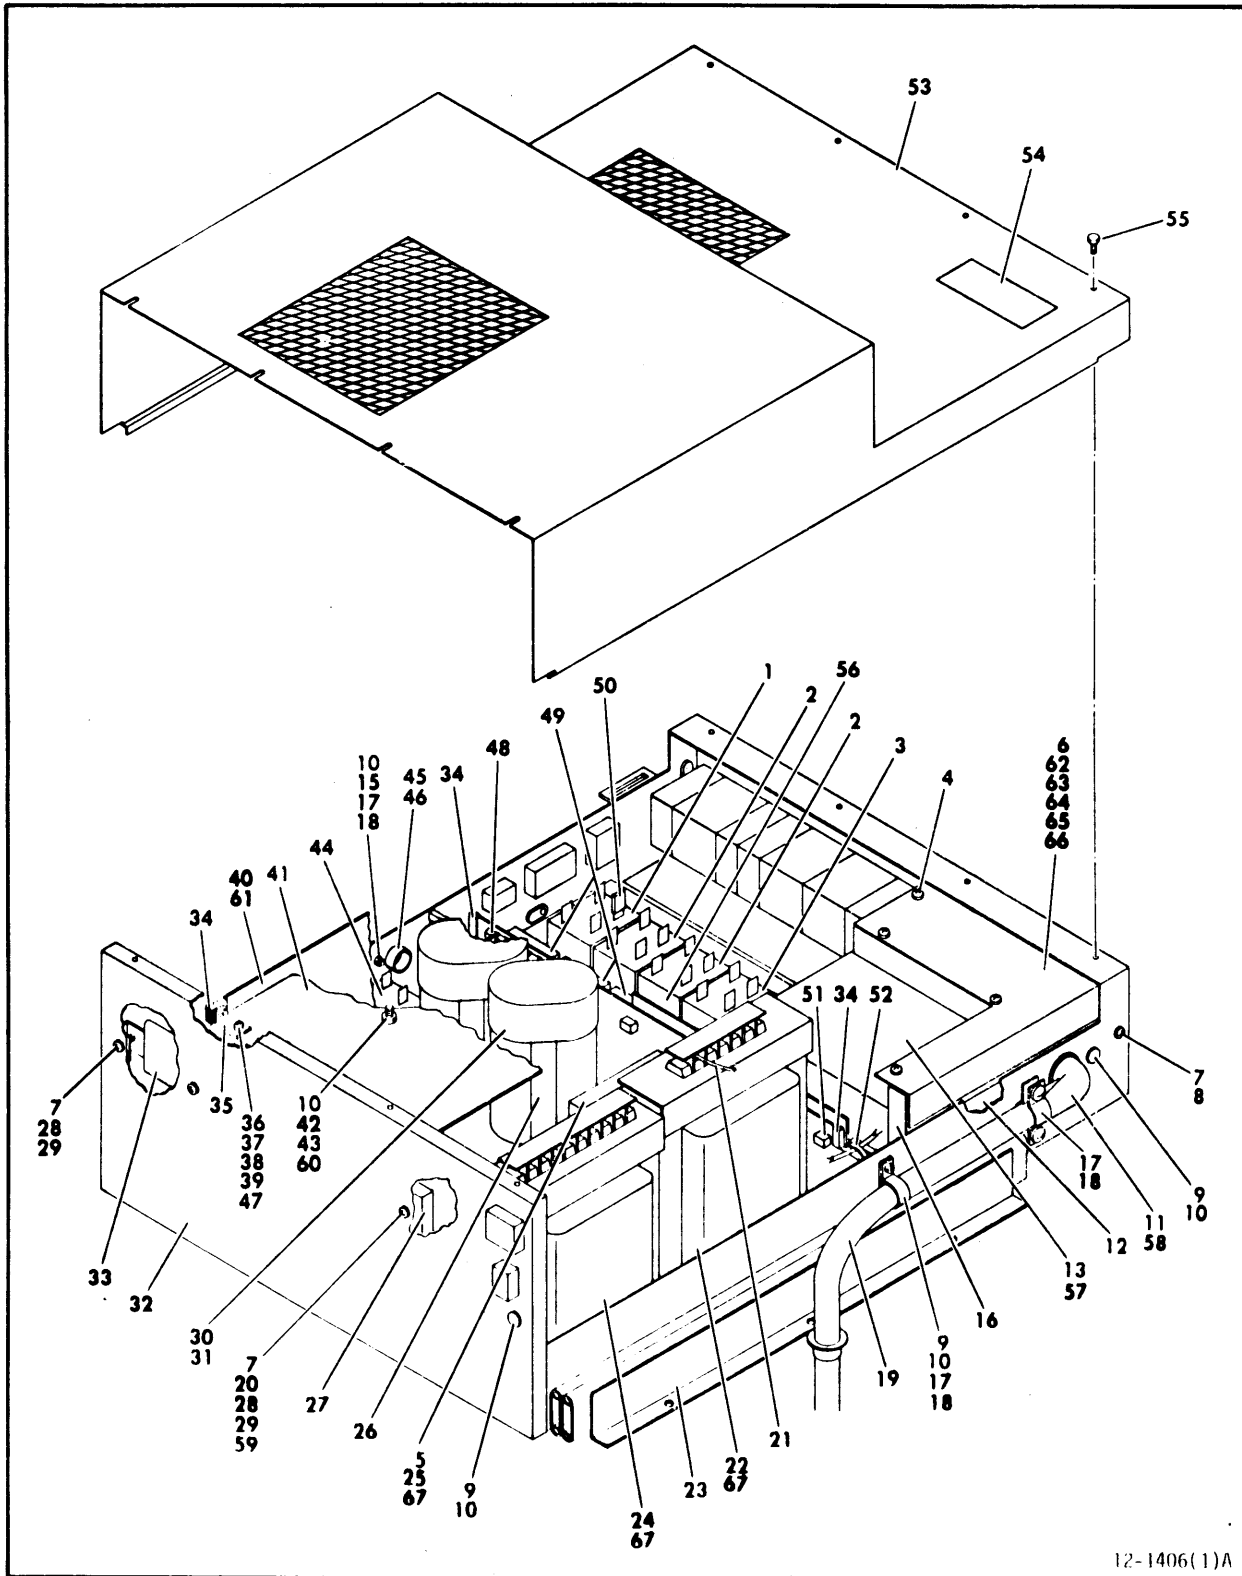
Power Supply Assembly (Sheet 1 of 2)
